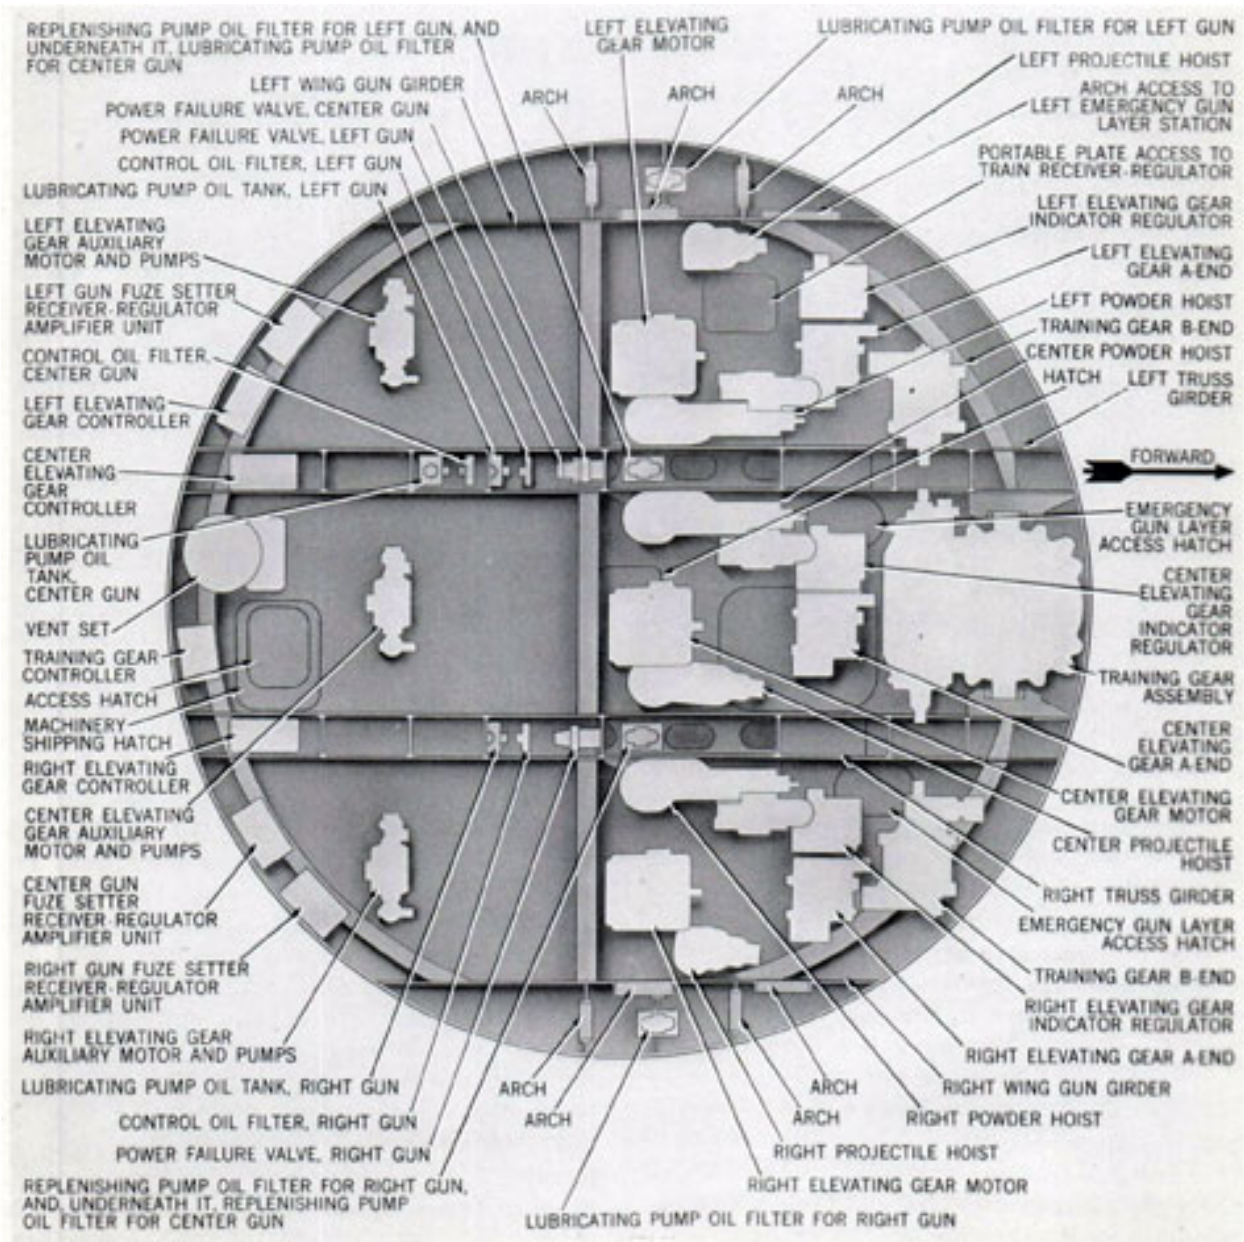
Ordnance Equipment on Pan Plate. General Arrangement. Plan View
